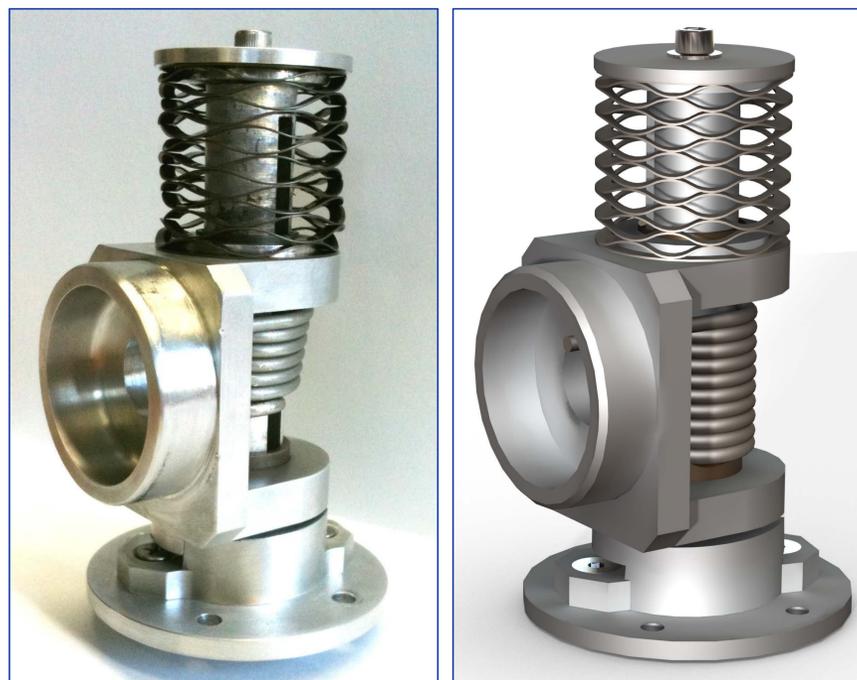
Prototype Model (left) and Solidworks CAD Model (right).
